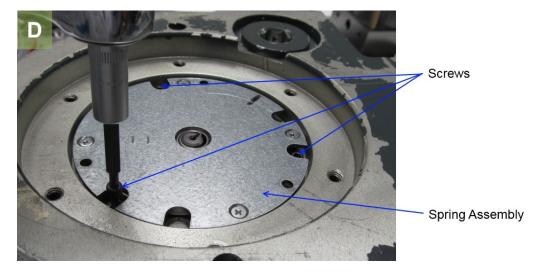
Remove Cover Screws and Note Letter on Spring Assembly Face
